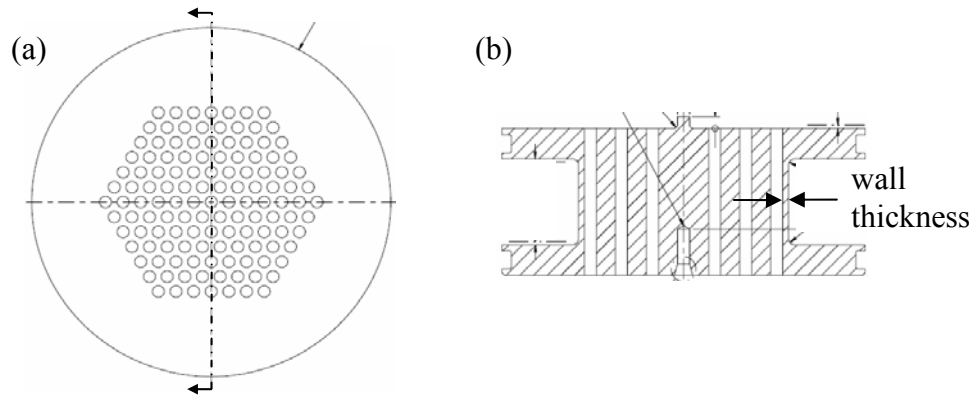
Ambient Heat Exchanger drawing. (a) top view and (b) cross-section.
